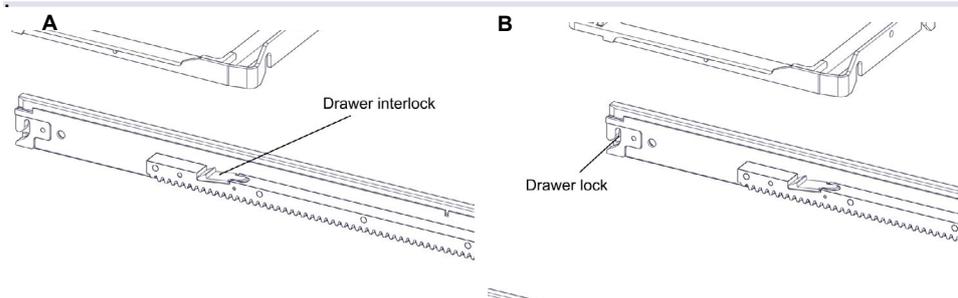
SCILA drawer interlock position (A =drawer interlock, B = drawer lock)
